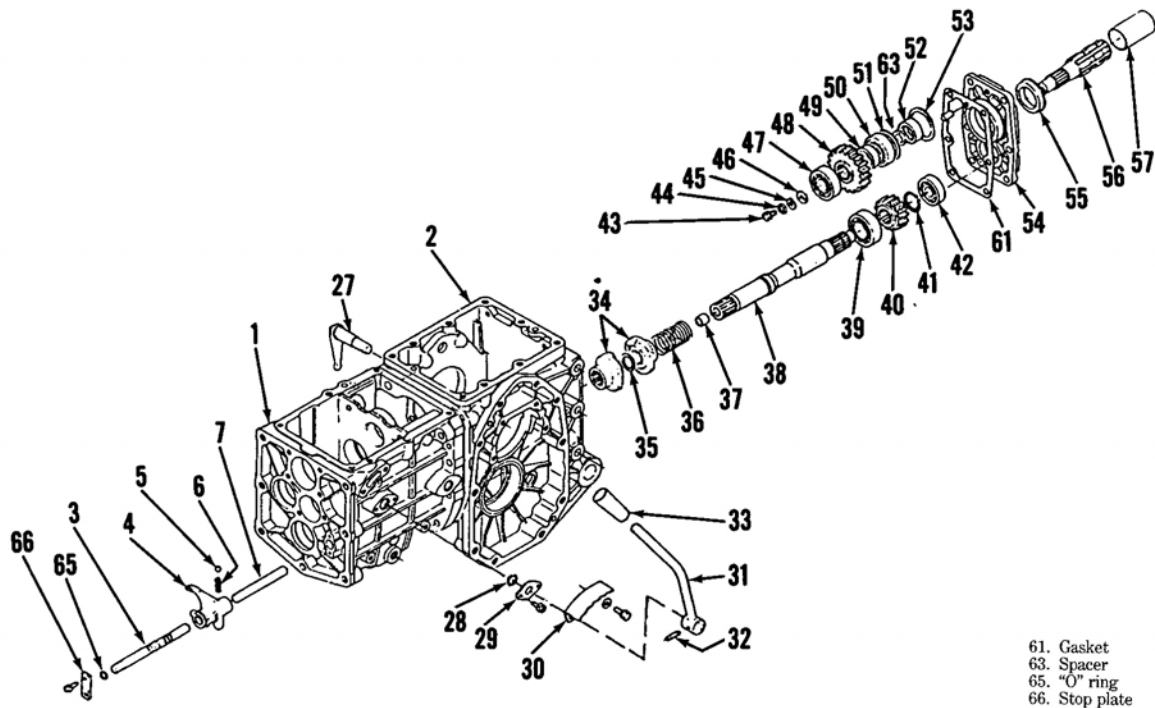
Exploded view of pto components used on Models B6100D, B6100E and B7100D. For identification of parts, refer to legend in Fig. 88 except for the following.
